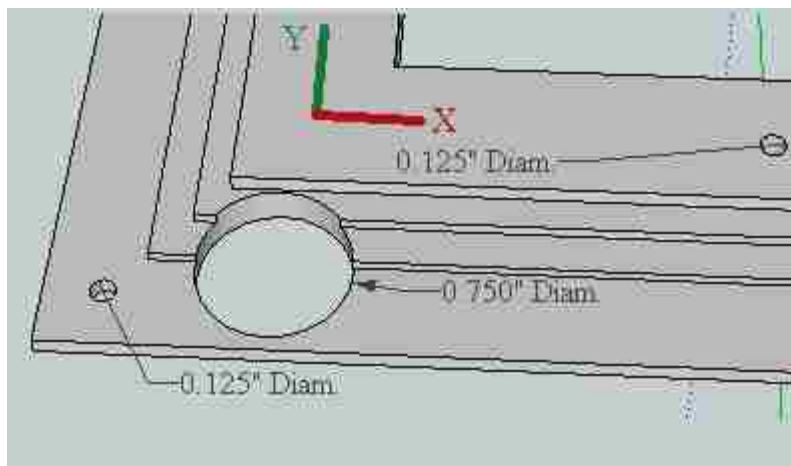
Orthogonal view of the 10x10 cm² lower trimmer lead plate illustrating hole dimensions.
